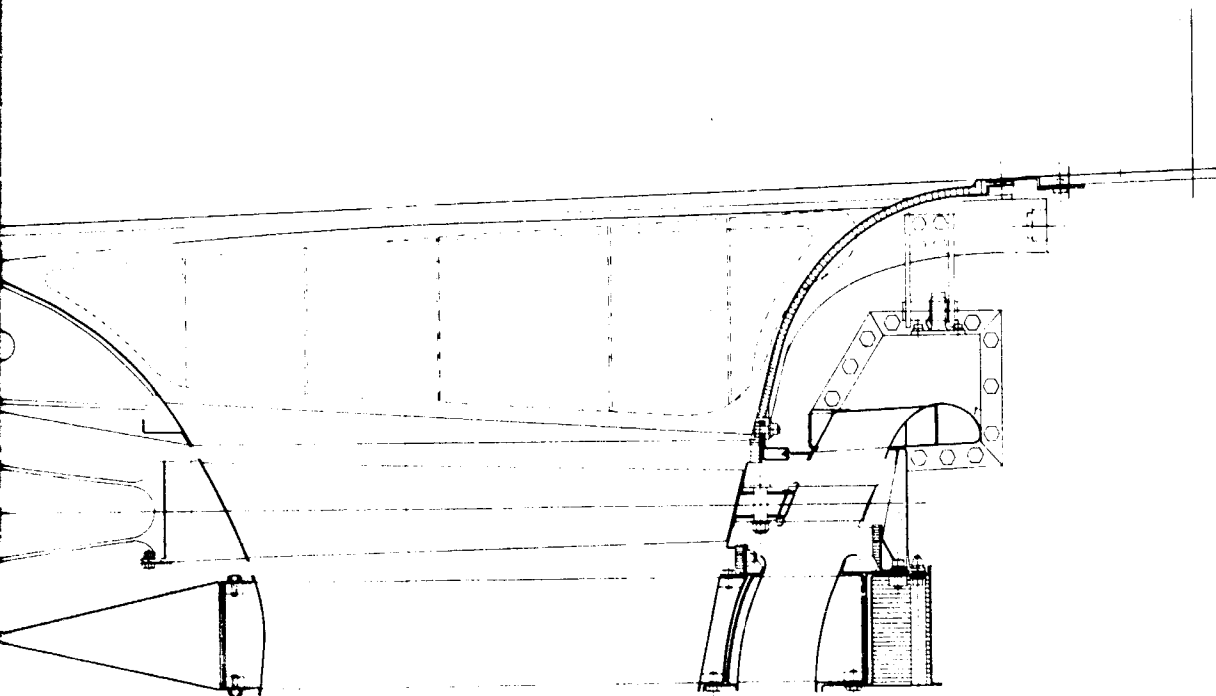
(U) LFV-6 Spanwise Section Assembly.
